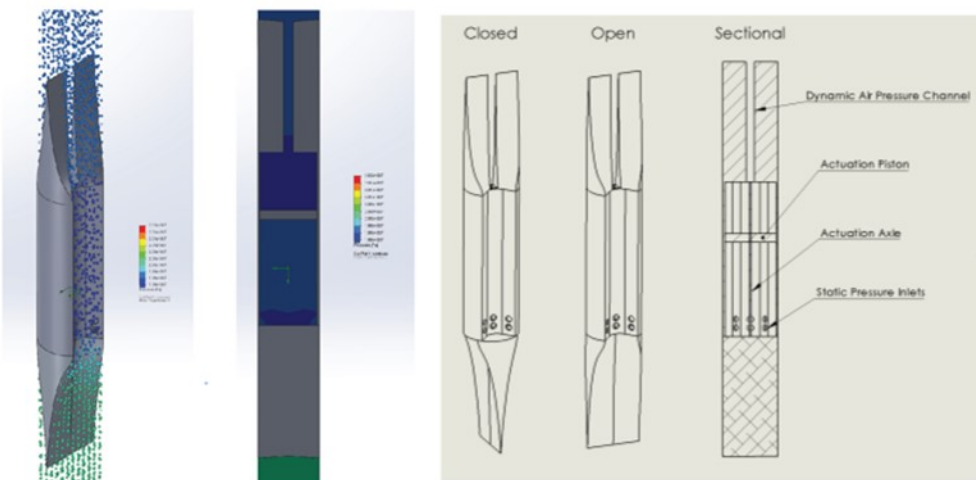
Flow simulations in Solidworks (left), Technical Drawings of Valve (right).
